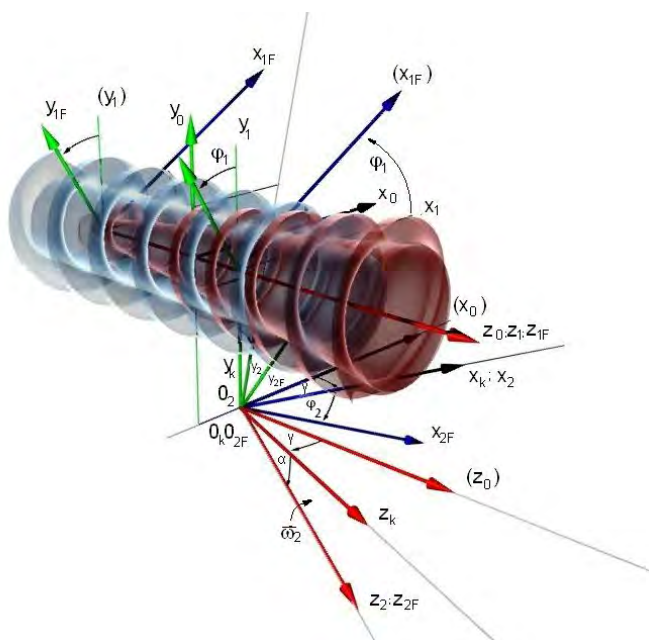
The manufactured cylindrical and the conical worms to an axe
